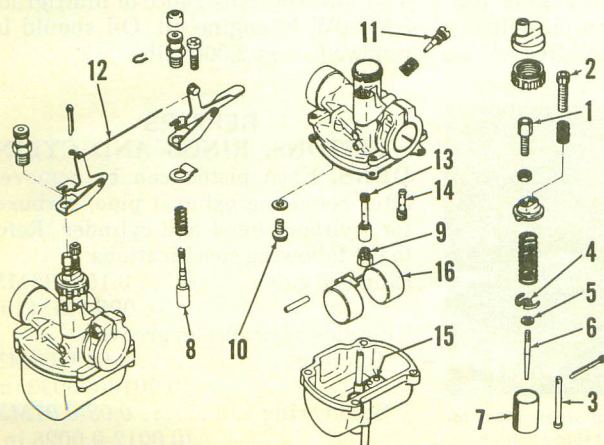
Exploded view of Mikuni VM carburetor. Starting valves for both carburetors are connected with rod (12).
